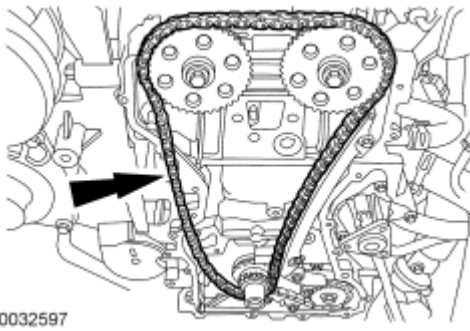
Locating Timing Chain Tensioner & Bolts
